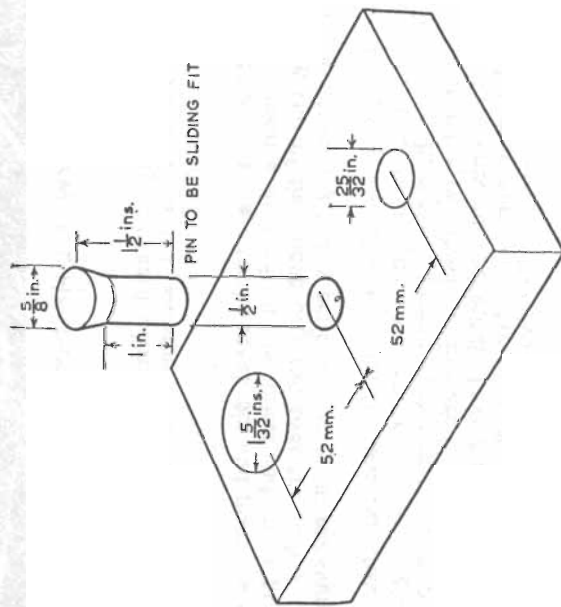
STEEL BLOCK FOR ASSEMBLING FLYWHEEL
